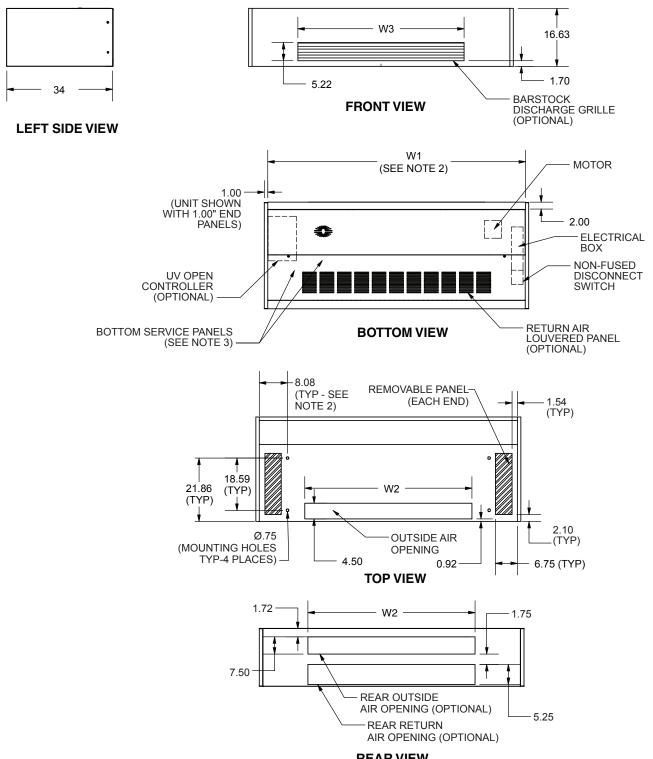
40UV Dimensions — $16^5/_8$ -in. Deep Units (Standard)
